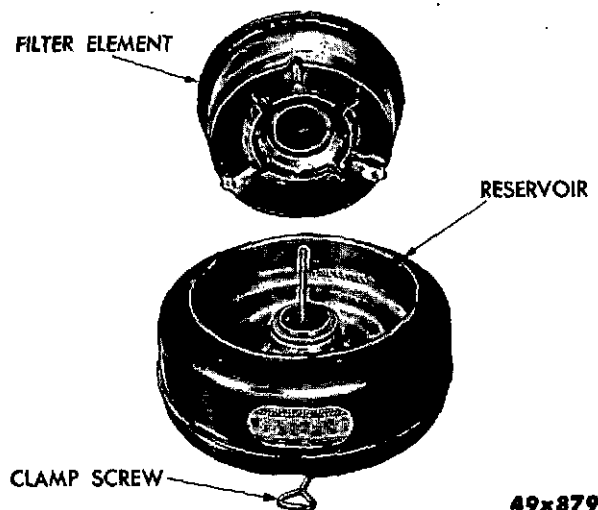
Typical Carburetor Air Cleaner (Exploded View)
